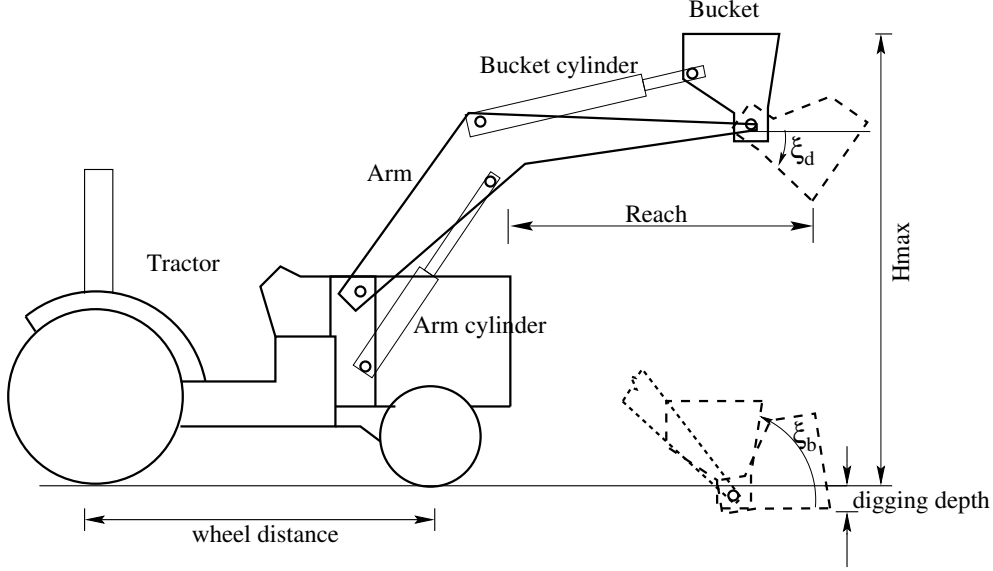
Tractor with front end loader attachment; bucket shown in four positions.
